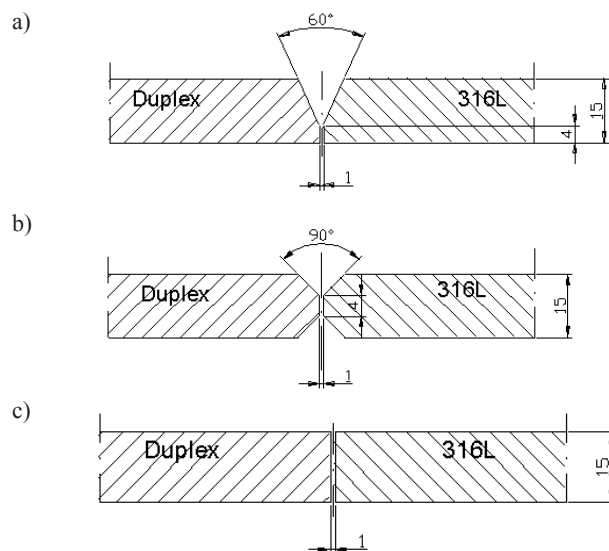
Edge preparation for dissimilar welded joints; a) Y, b) 2Y, c) I edge preparation
